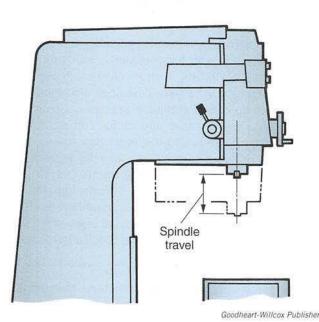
The spindle head is fixed in a vertical position on a sliding-head milling machine. The entire head is moved to make cutting adjustments.
